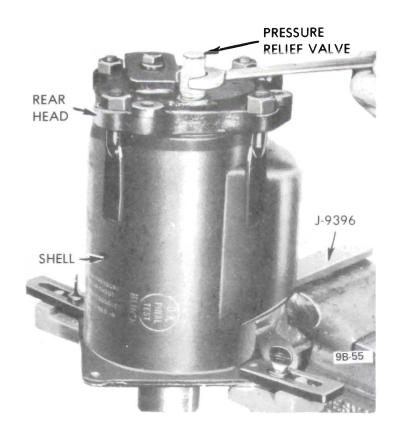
B-63 Compressor Installed in Holding Fixture 9B-64), replace rear head. Clean or replace suction screen as necessary.
